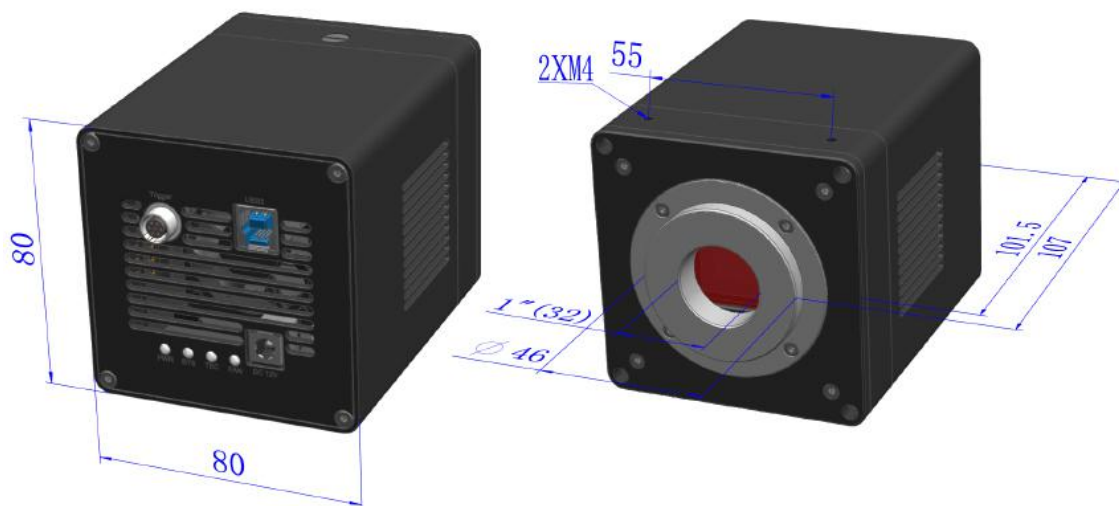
1 sMAX04BM & sMAX04BM-U100 dimensions (mm)
